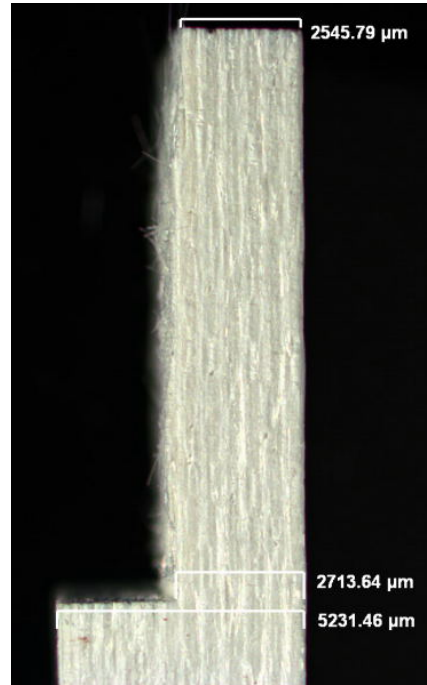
Side view of the specimen fracture surface aged 24 h in steam at 1200°C prior to failure.
